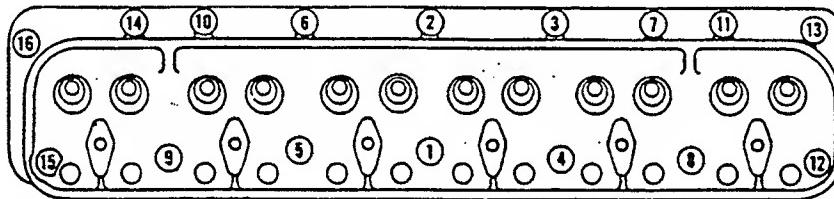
CYLINDER HEAD BOLT TIGHTENING SEQUENCE
